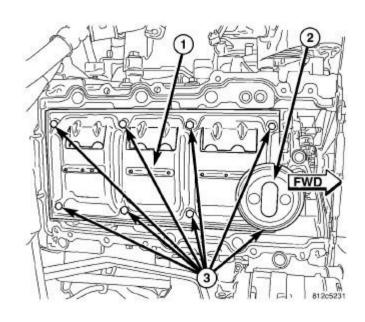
Oil Seal Retainer Courtesy of CHRYSLER LLC
